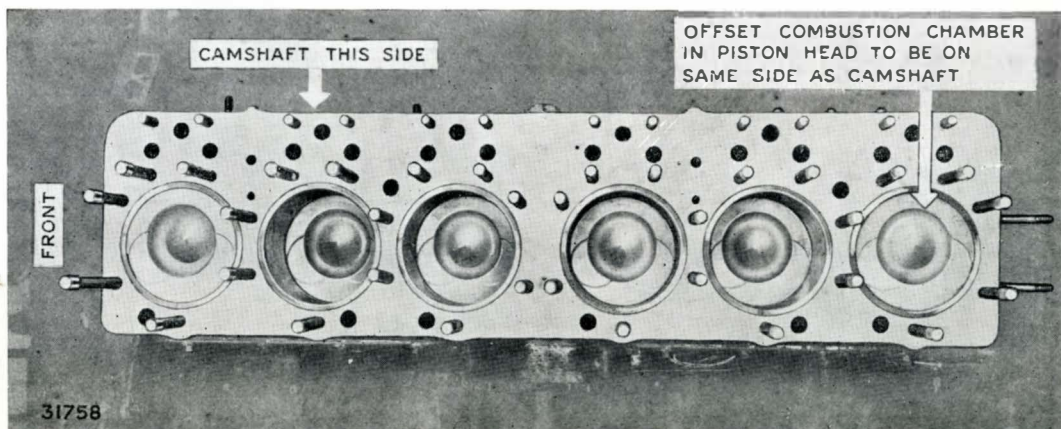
POSITION OF OFFSET COMBUSTION CHAMBERS IN PISTON HEADS, IN RELATION TO THE CAMSHAFT
